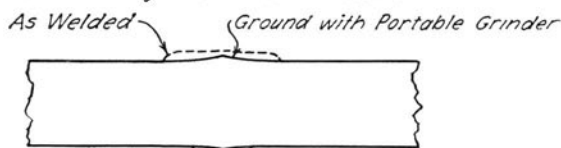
WELDING PROCEDURE. SERIES K
